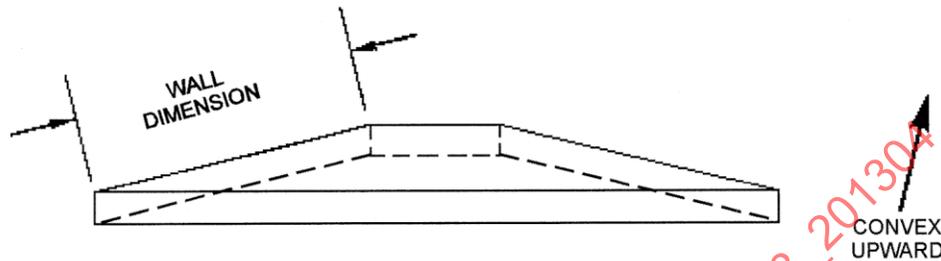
CONICAL WASHER TOLERANCE
